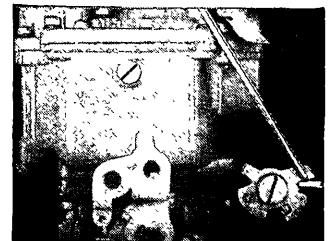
Install fast idle cam. Make unlader and fast idle adjustments (see text), and starter switch adjustment as given in the Starter Switch chapter
